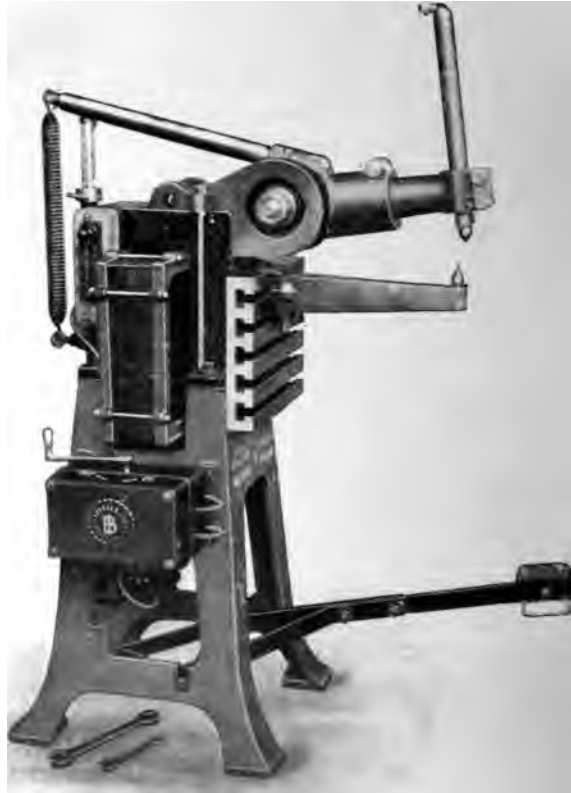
PRESCOT SPOT WELDER.
